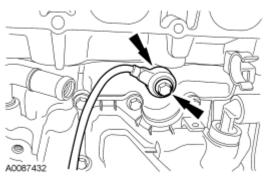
Locating Knock Sensor Bolt Courtesy of FORD MOTOR CO.
